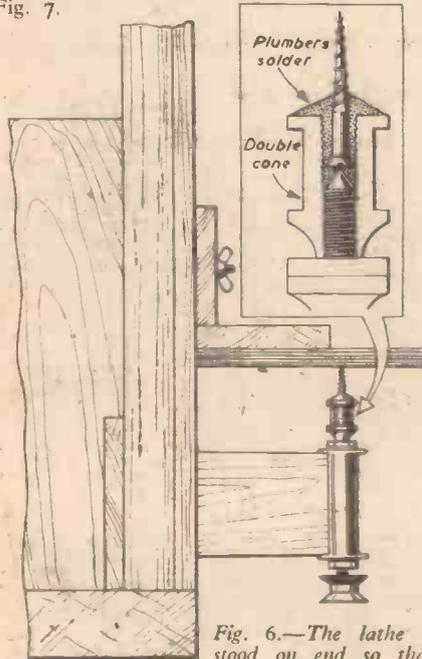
The lathe is stood on end so that the screw centre is vertical.
